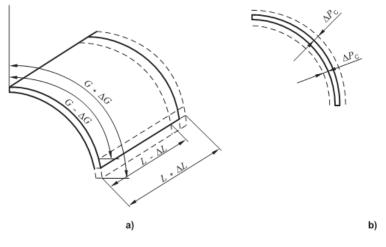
Tolerances on shape accuracy, girth and length
